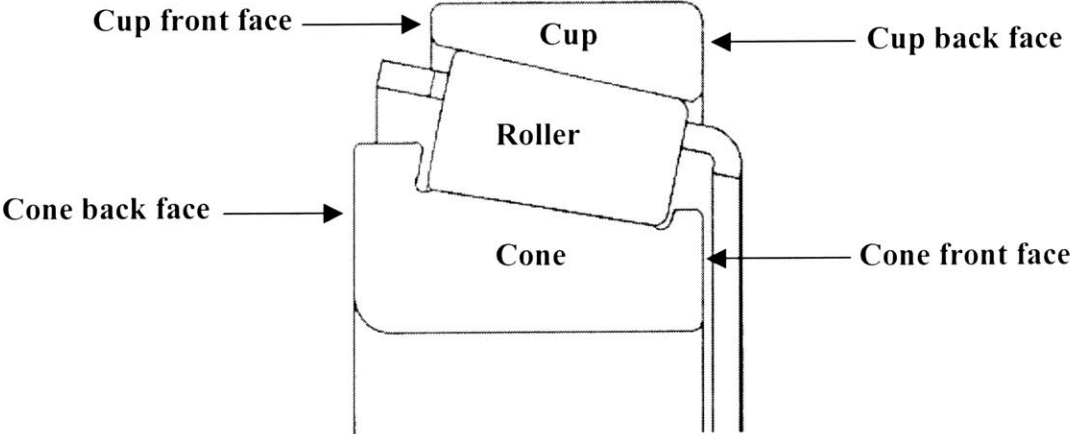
Tapered roller bearing cross section and its components (Courtesy of The Timken Company)
